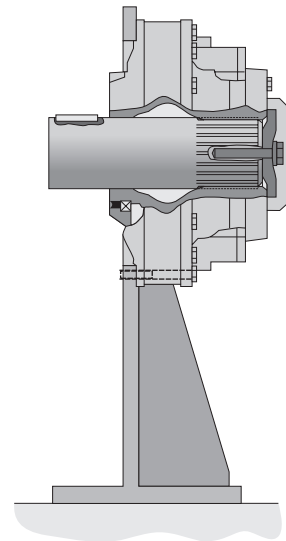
Flange mounted motor with through shaft for high radial load.
